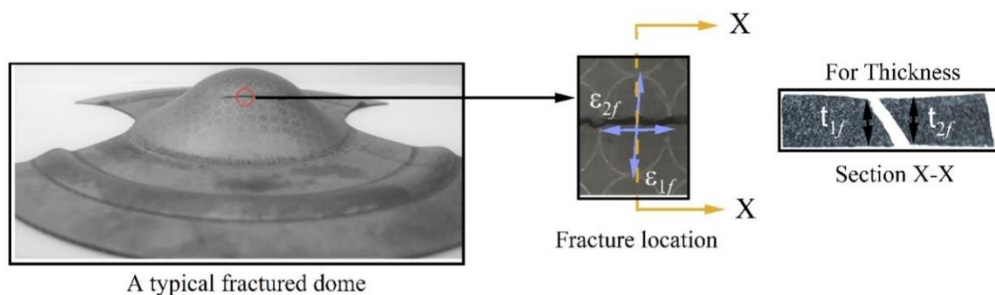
Measurement technique for fracture along the thickness direction of a fractured specimen
